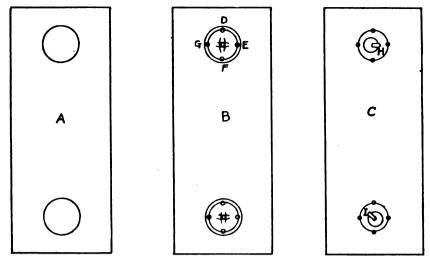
HOW HOLES ARE DRILLED FOR SCREWS
